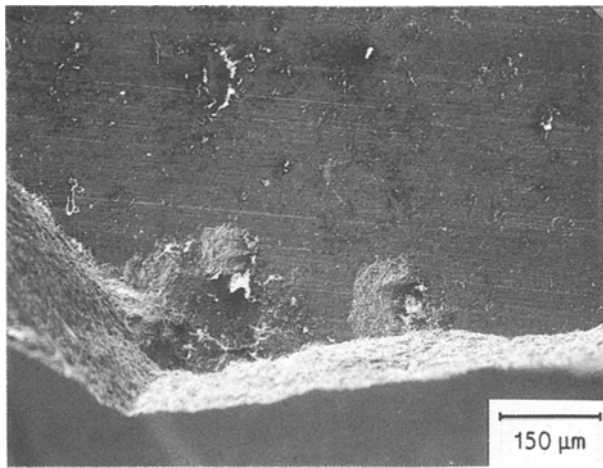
Fracture origin in AS440 showing multiple impact flaws linking up prior to final fracture.
